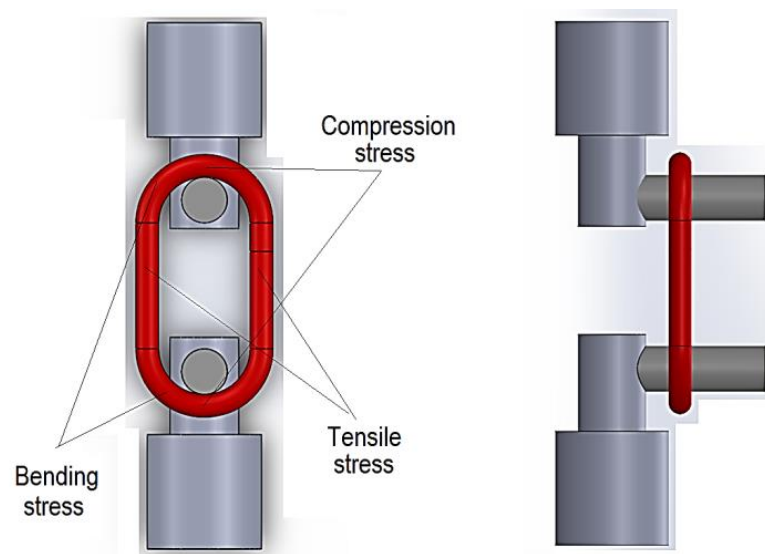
Way to clamp the chain link on the tensile test machine, using two bolts.
